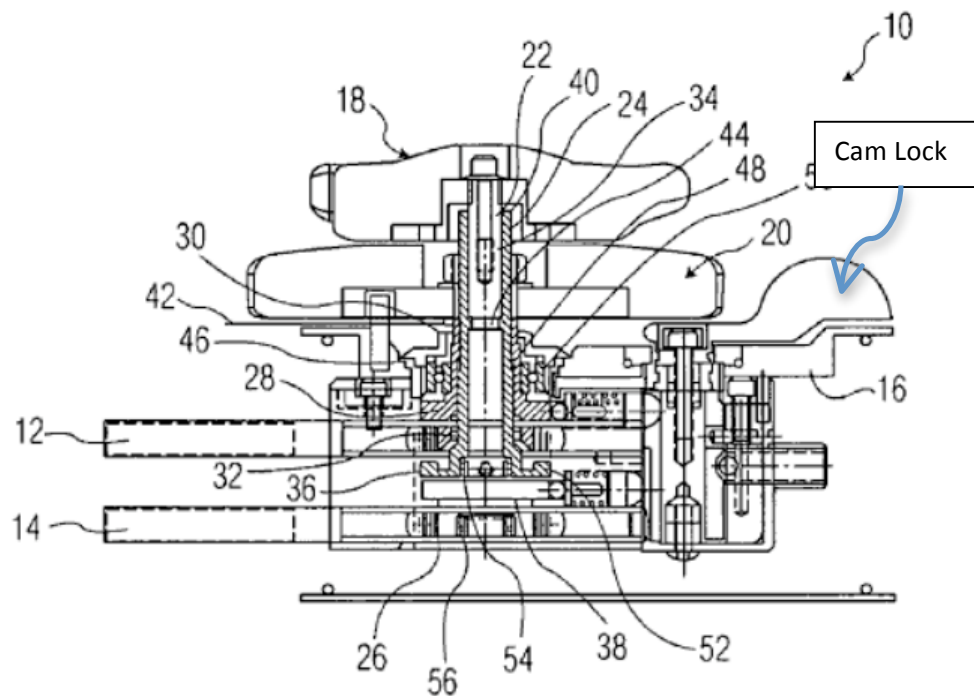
Cross-sectional View of the knob control mechanism and cam locking system. Refer to section 2.6 for more details [8].
